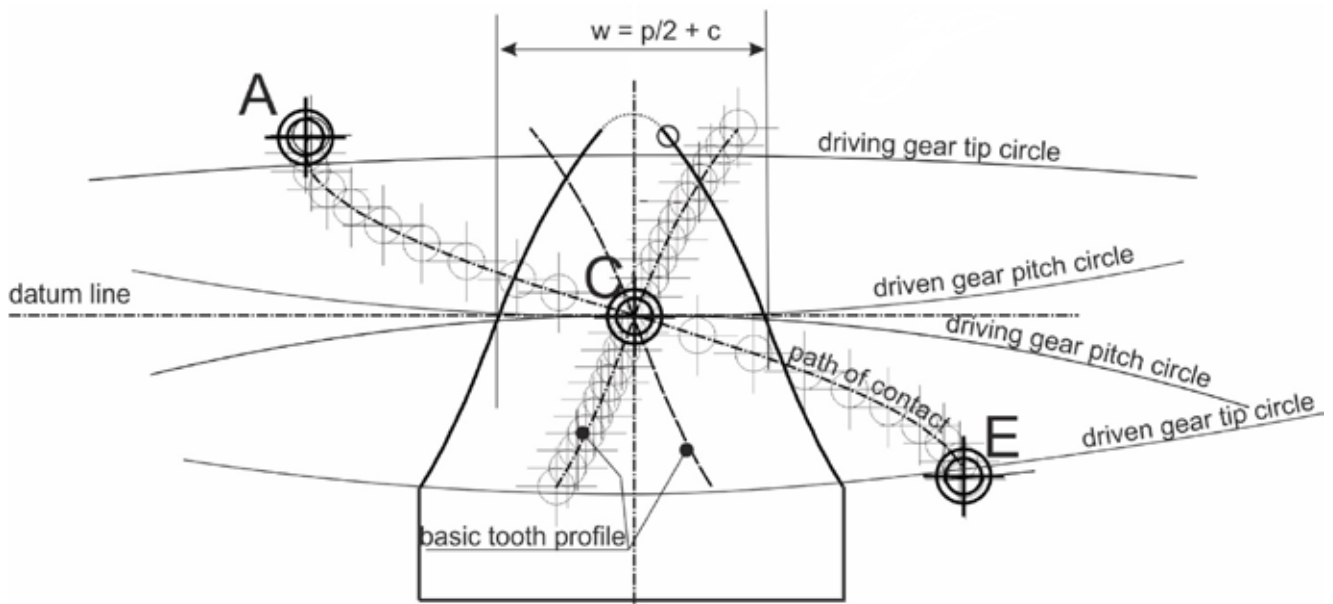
Profile of the cutter used for machining S-gear tooth spaces
